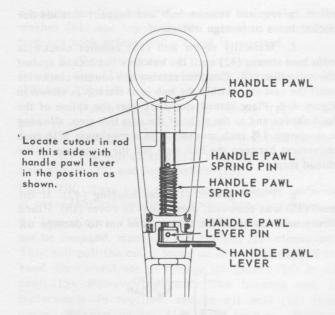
LEVER AND ROD ASSEMBLY
